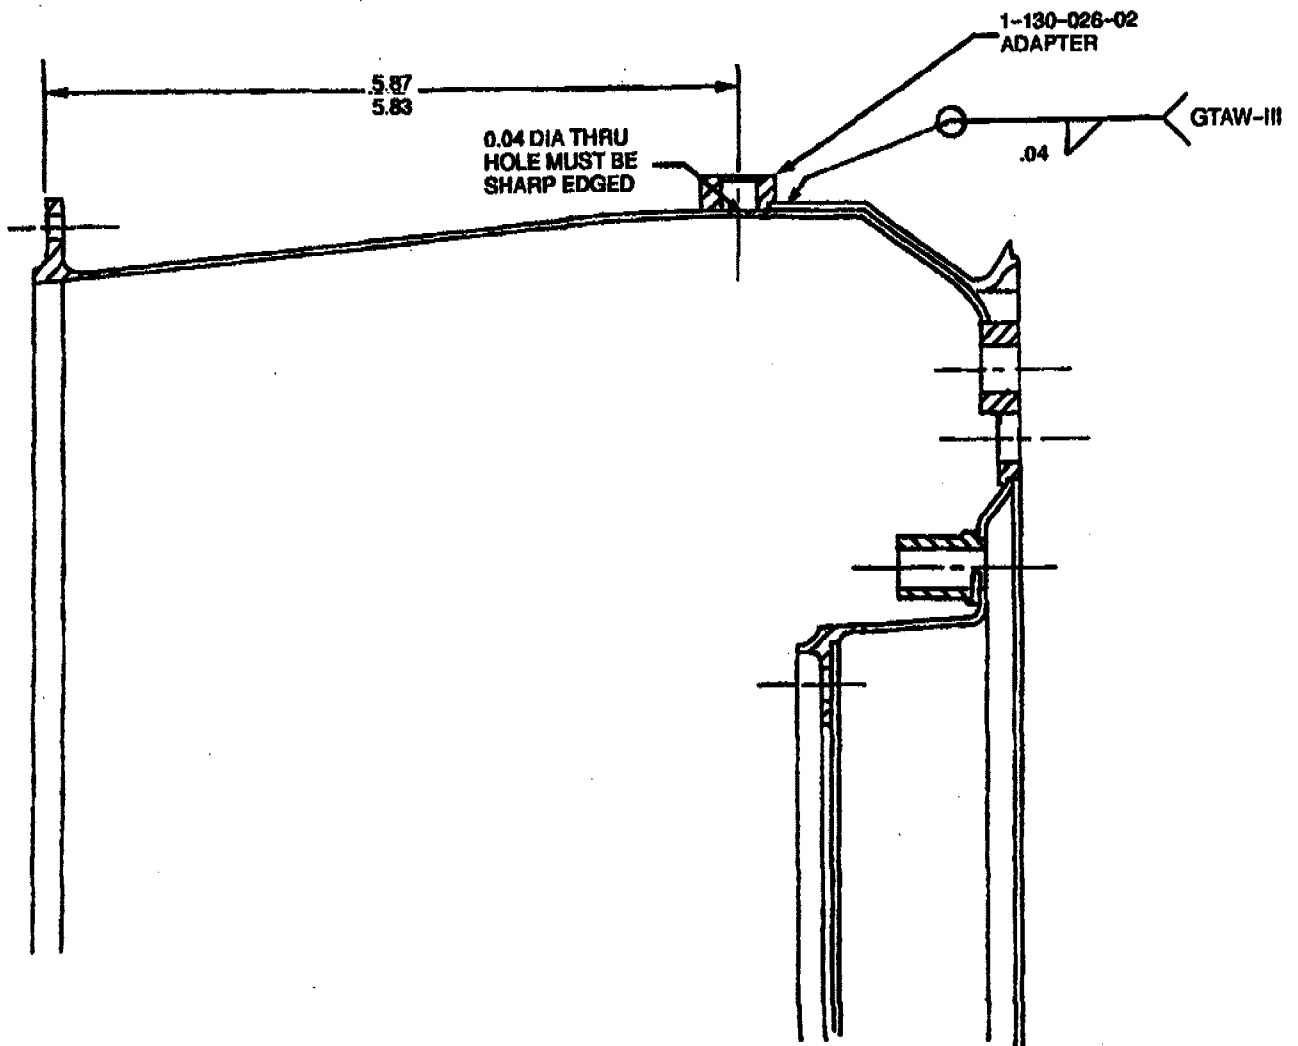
Static Pressure Tap Adapter (Sheet 1 of 2).
